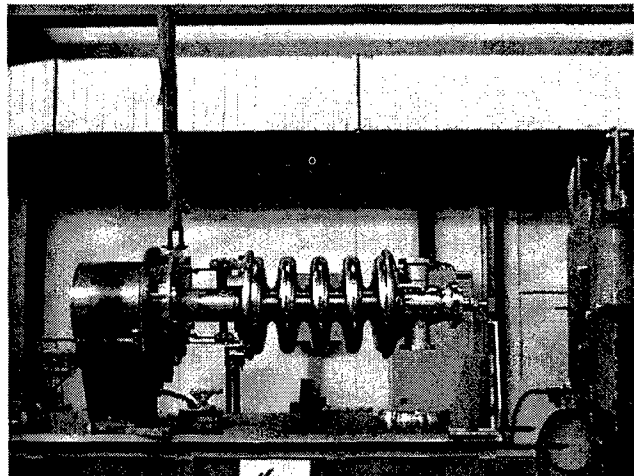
ED&D SCRF cavity mounted for the final EB welding.
